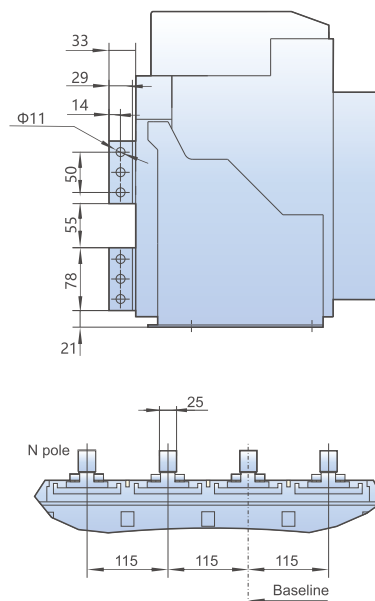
Horizontal busbar connection of NA8-4000 fixed type ($I_n=1600A\sim 2500A$)
